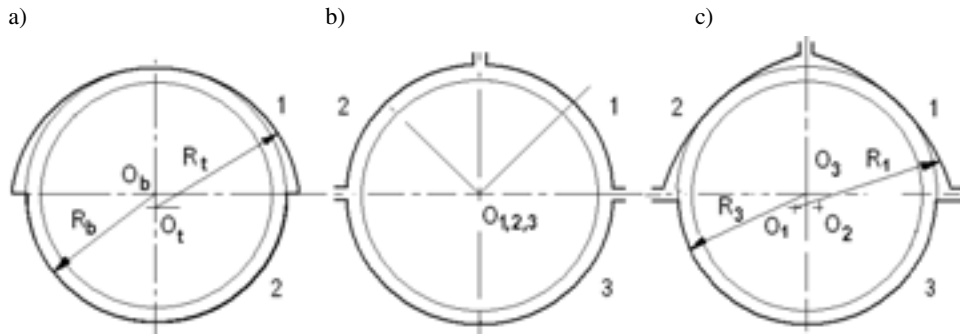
Examples of multilobe journal bearings: a) half-lemon, b) cylindrical 3-pockets, c) 3-lobe asymmetrical (combined profile); R_t , R_b – radius of upper and bottom lobe, O_b , O_t – centre of bearing (centre of bottom lobe) and upper lobe, O_1 , O_2 , O_3 – centres of lobes
